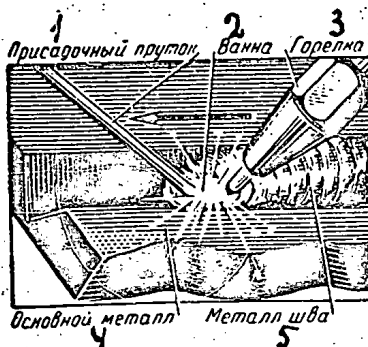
Schematic view of oxy-acetylene welding process:
